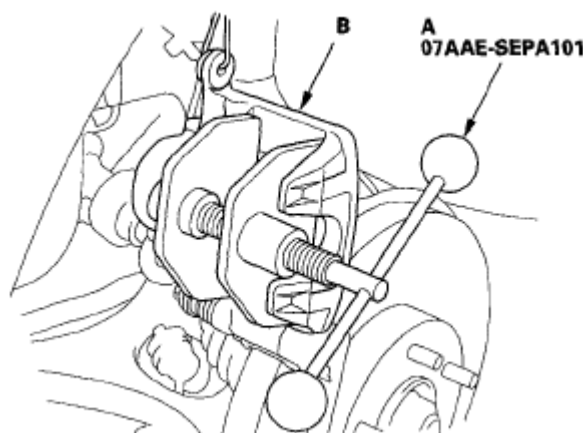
Mounting Brake Caliper Piston Compressor On Caliper Body
